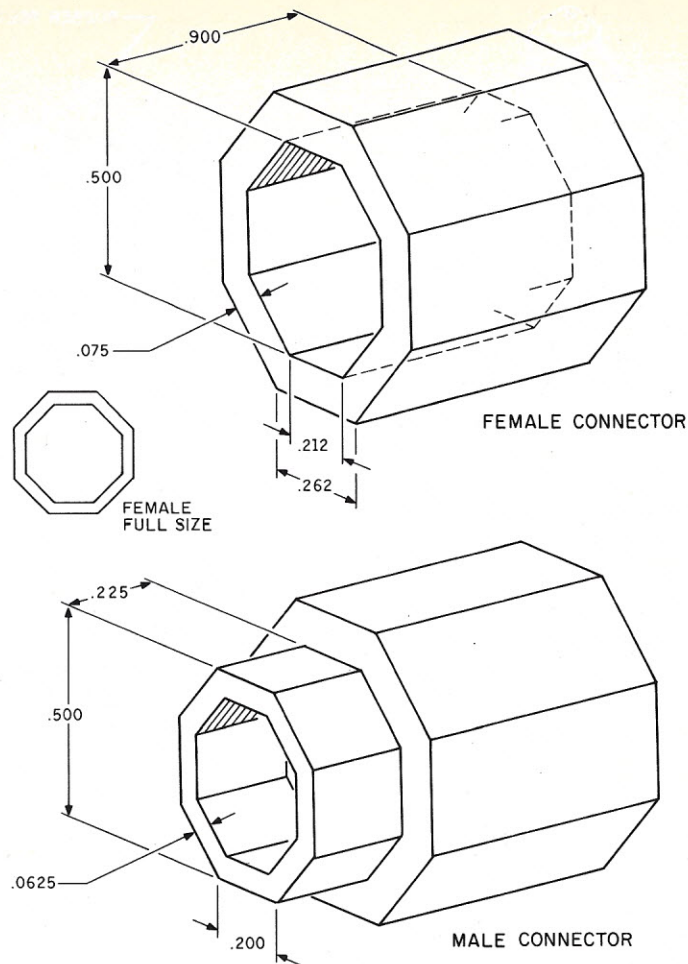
Mechanical details of the octagonal connector element used throughout the Robotix series structural pieces. All dimensions are in inches.
